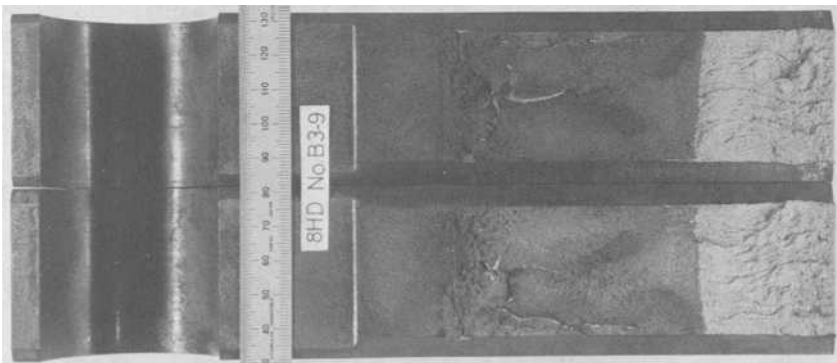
Fracture surface appearance of a standard specimen tested at room temperature.
